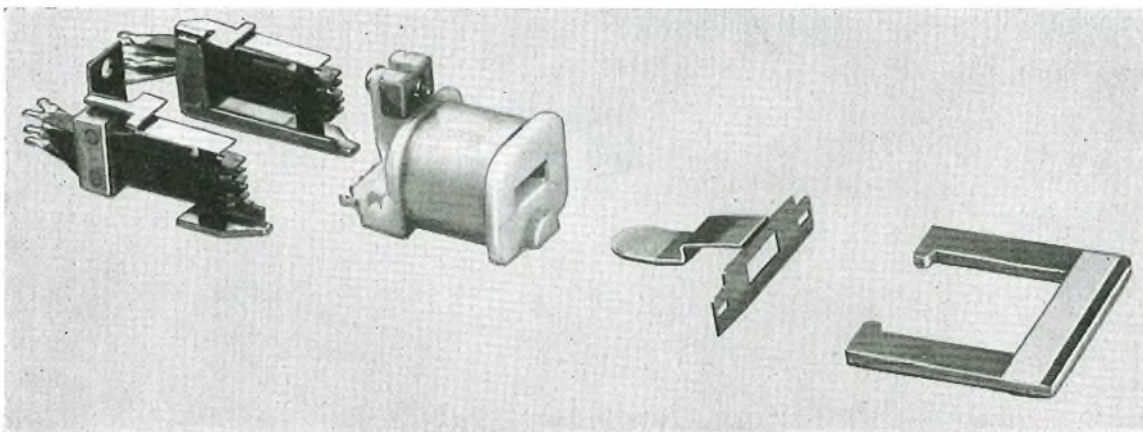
COMPONENT PARTS OF TYPE 12 RELAY
